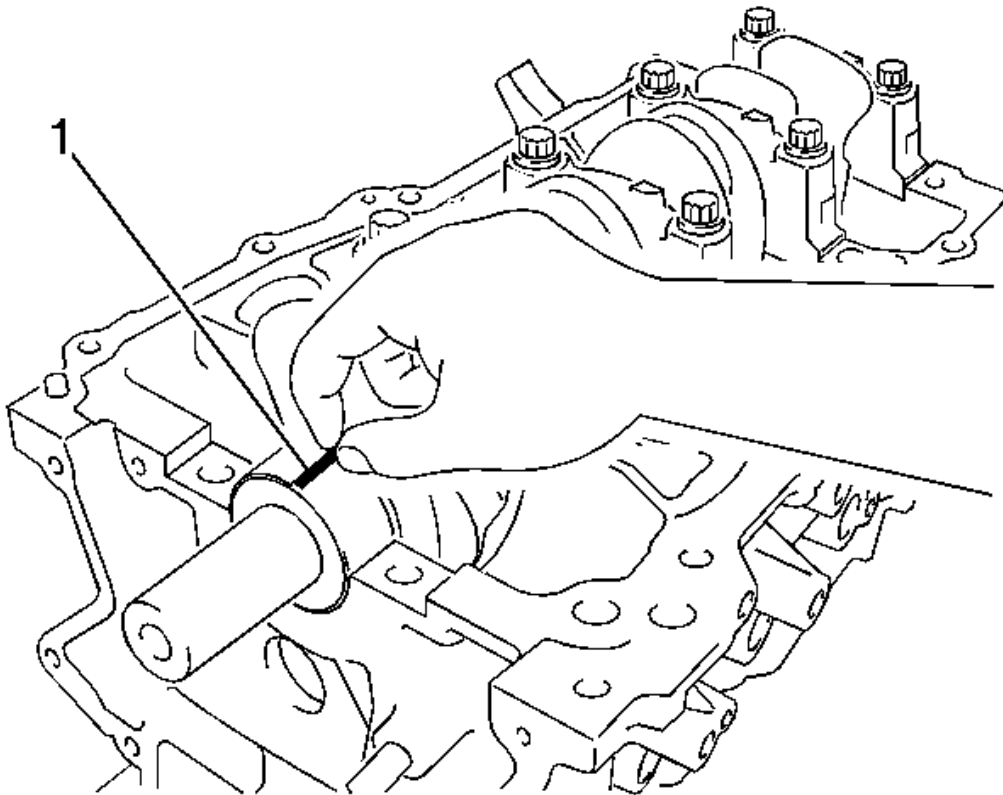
View Of Measuring Journal Clearance Using Plastigage
